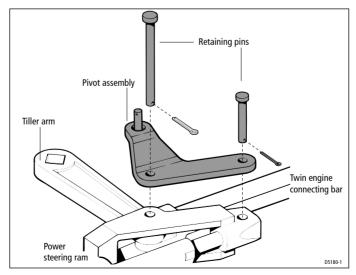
Fitting the pivot assembly (Mercruiser 95)
